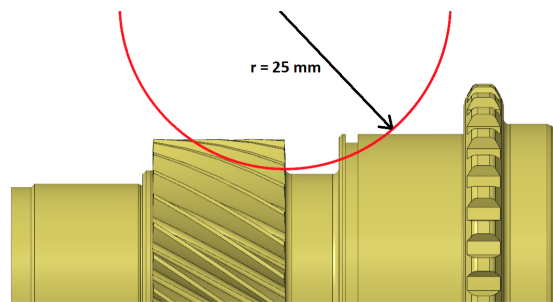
Manufacturing by hobbing of the helical gear teeth.
